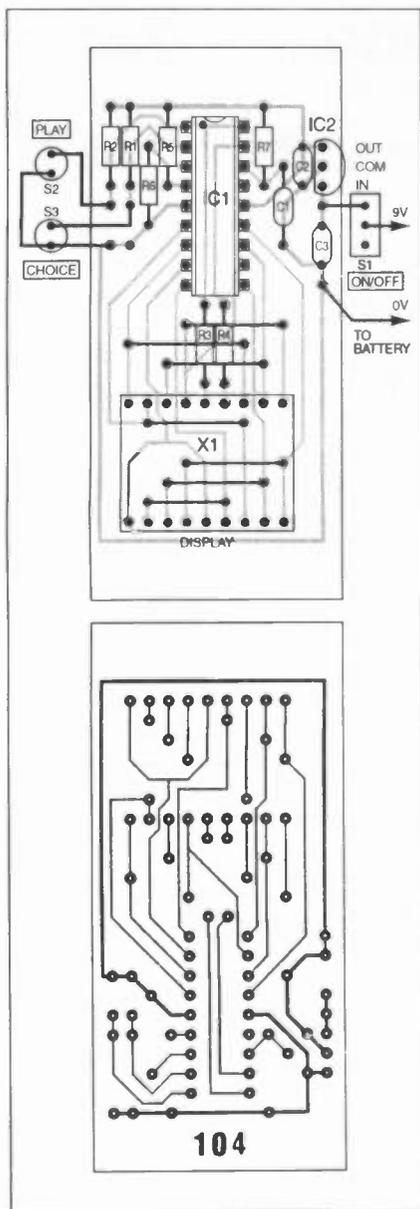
Printed circuit board component layout and full-size underside copper foil master track pattern.
